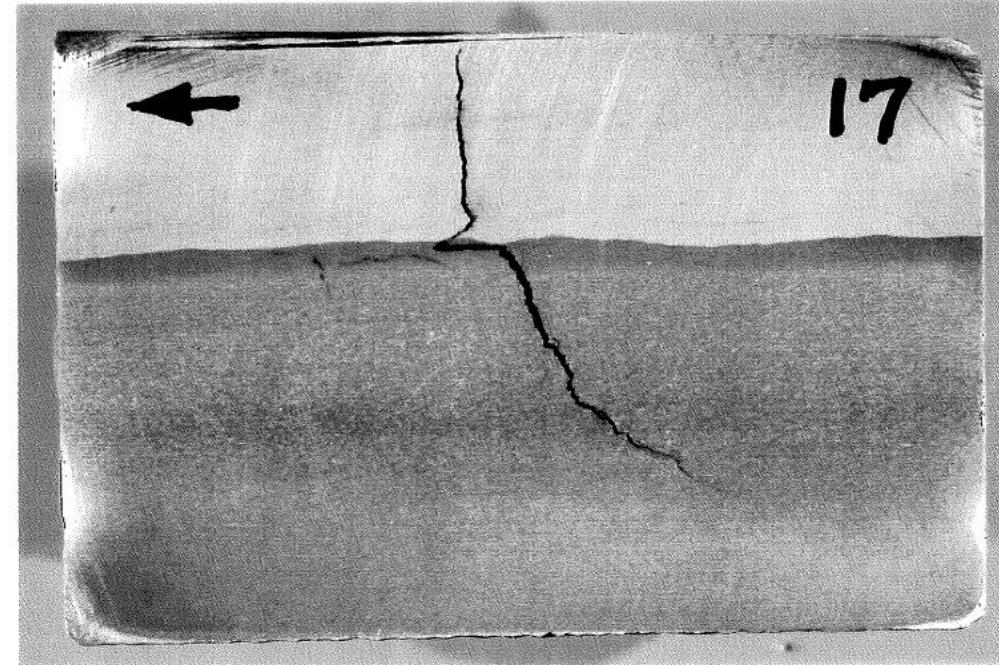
Longitudinal Cross-Section through Core #17 Showing a Transverse Weld Metal Crack and Propagation of the Crack into the Flange. Arrows Show HAZ Cracks and their Propagation into the Base Metal Adjacent to Primary Crack.
